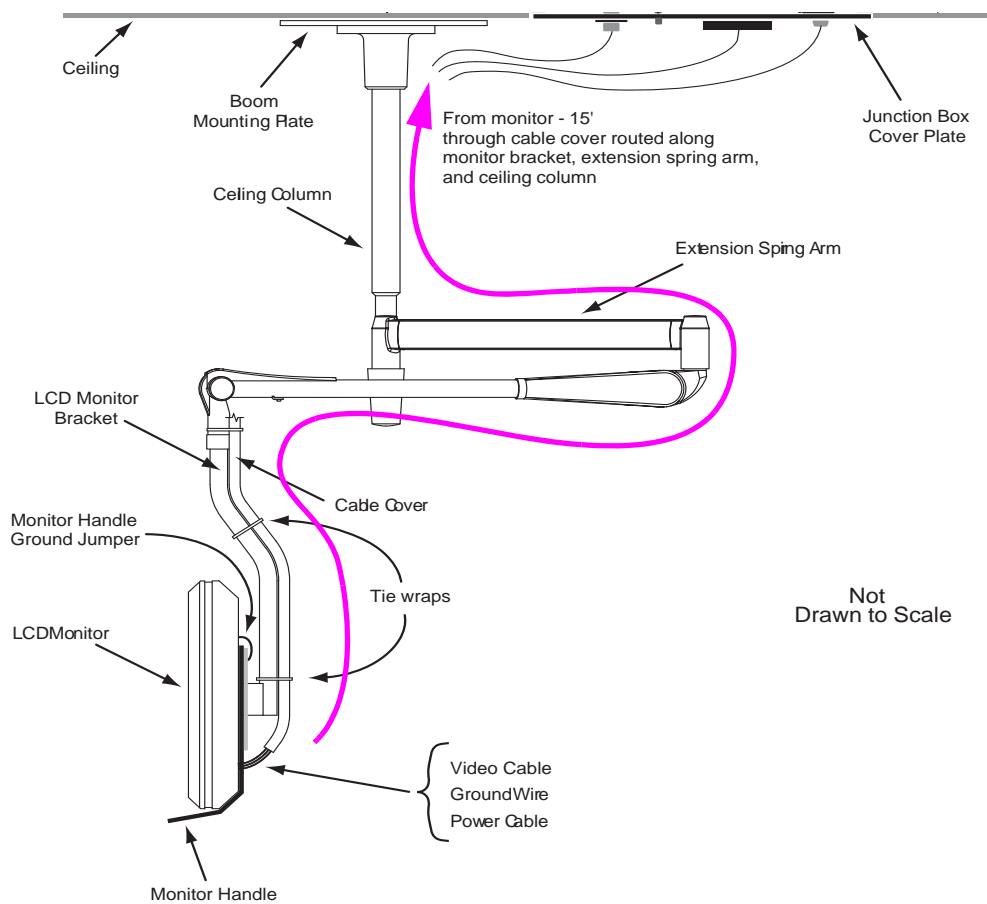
LCD Monitor Assembly with Cables and Cover
